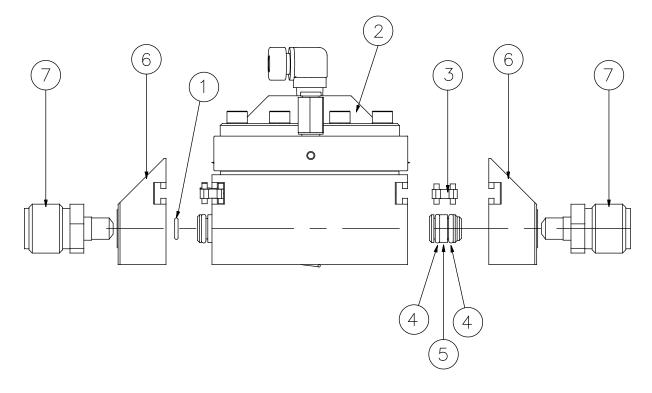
A10827-00 Stand Alone Regulator Assembly
